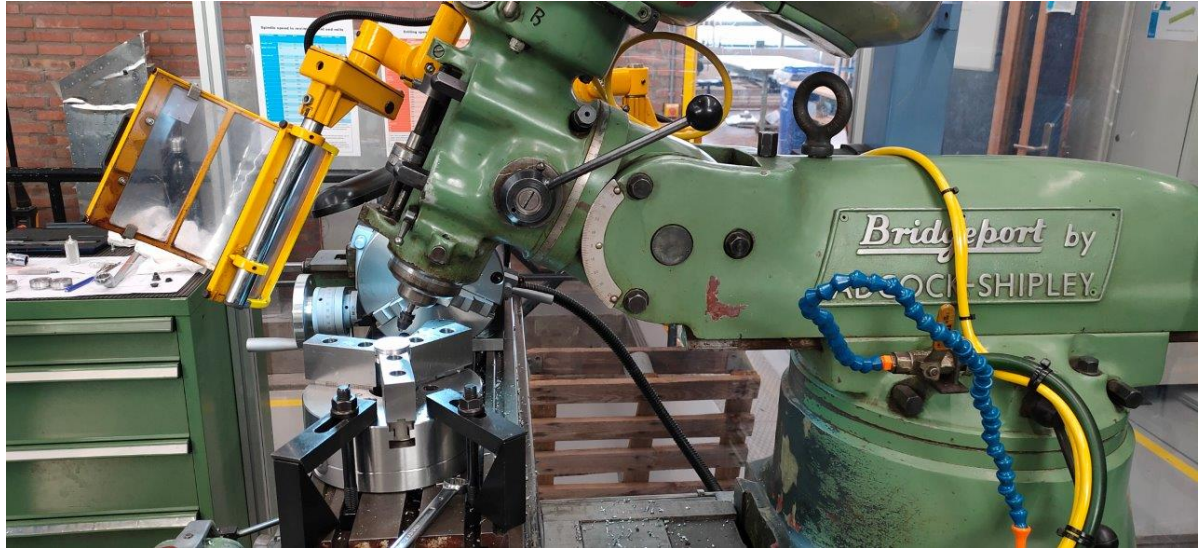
The Bridgeport mill set at a 25 degrees angle to drill two injector holes. Also note the clamping setup of the chuck.
